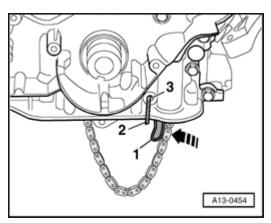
Unscrewing/Screwing Bolts And Removing/Installing Chain Tensioner From Front Sealing Flange
